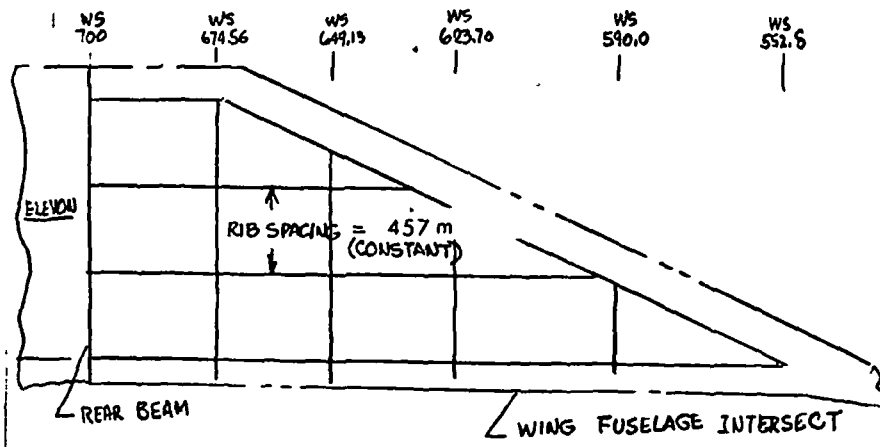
Wing Rib/Spar Spacing - Aluminum Designs
